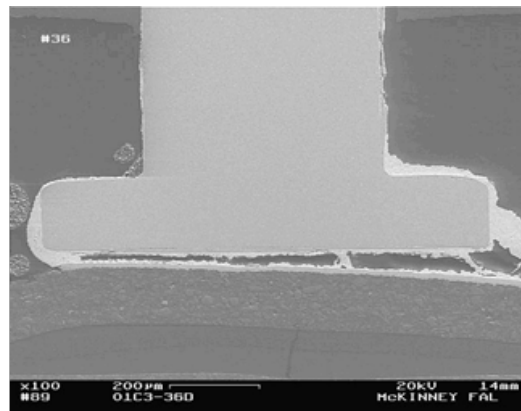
Cross-Sectional Image of Failed Pin Solder Joint (100X).
